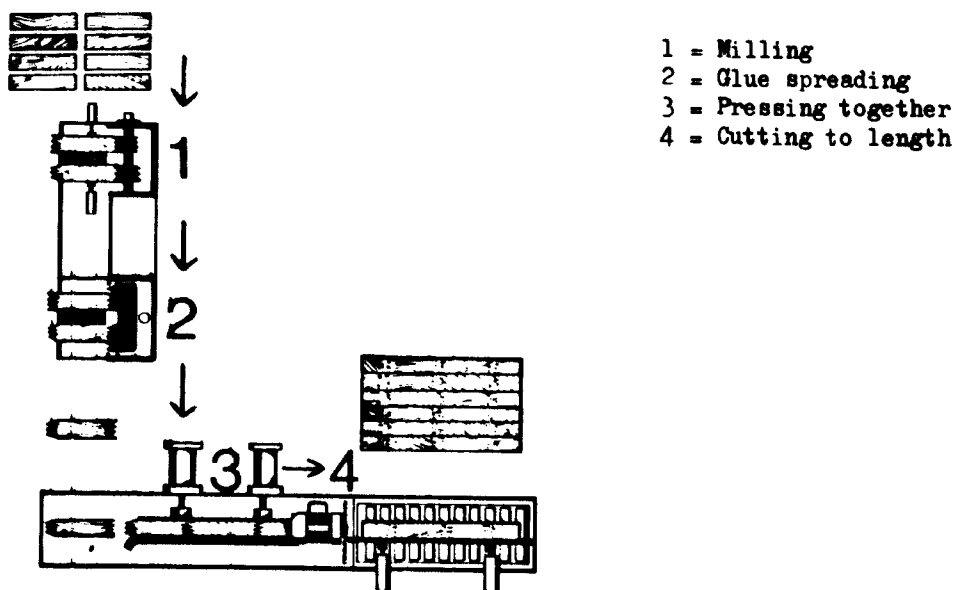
Finger jointing plant, consisting of universal milling machine and press with cross-cut saw. Off cuts can be processed into useful timber starting from 200 mm lengths.
